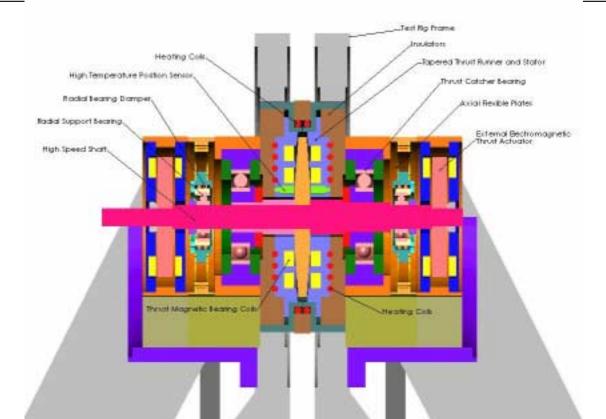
High Load Thrust Magnetic Bearing Test Rig
